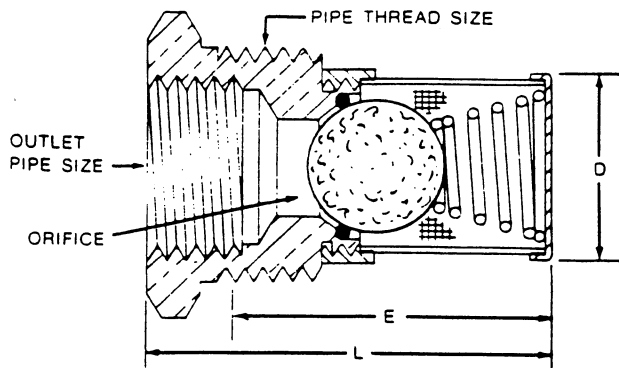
Dimension drawing, Johnson Vacuum Breakers (Series VB8).
